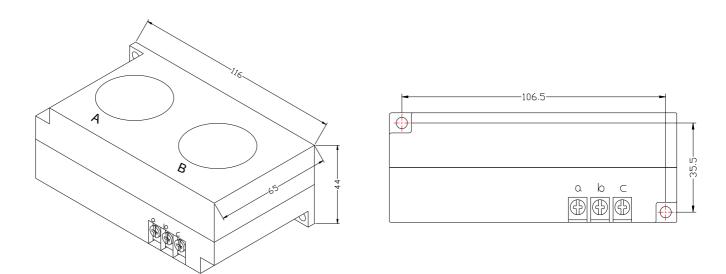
Structure dimensions of CT1 (φ36 through hole)
